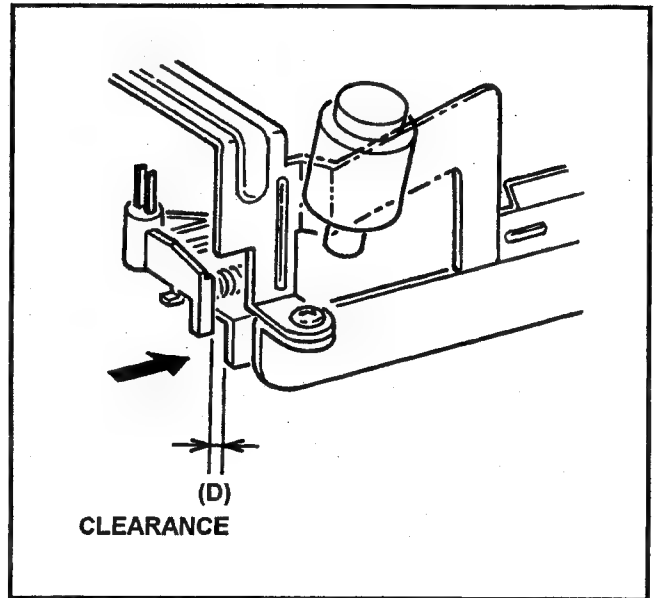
Cleaner Solenoid Position Adjustment
